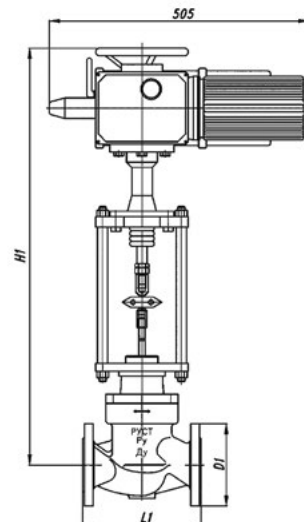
Overall and connection dimensions of 300, 400, 500 series Roost® valves with SCHIEBEL electric actuator
